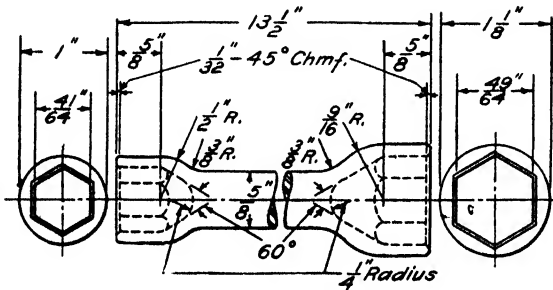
Typical hot-headed double-end socket wrench, the ends being forged hollow by a combination of upsetting and piercing to form hex sockets.
